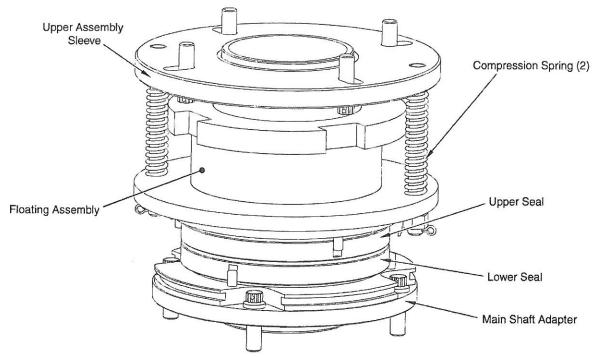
Direct Coupled Mechanical Washpipe Assembly
